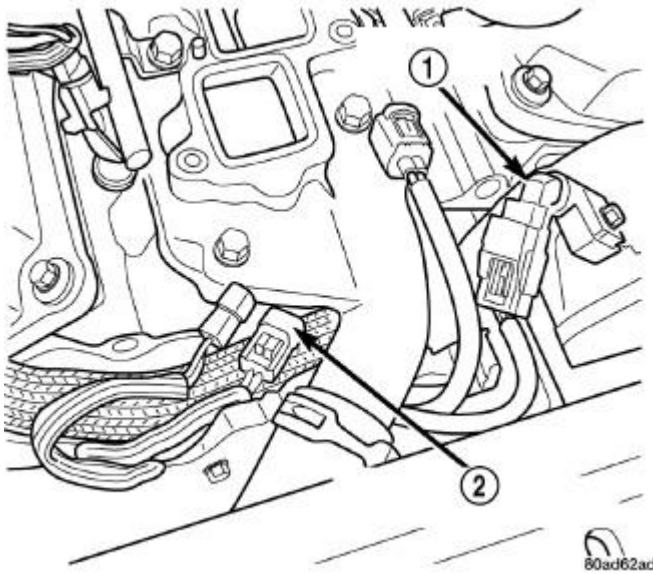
Engine Coolant Temperature Sensor - 3.5L
